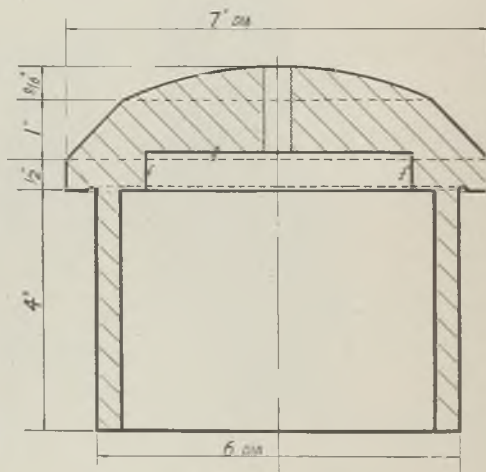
FIG. F.—REVERSED METHOD OF RUNNING VALVE CASTING.
